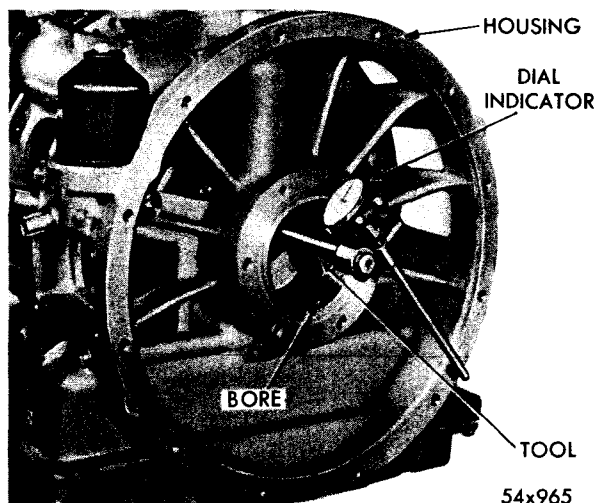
Checking Runout of Torque Converter Housing Bore with Tool C-870 and Dial Indicator Tool C-430
